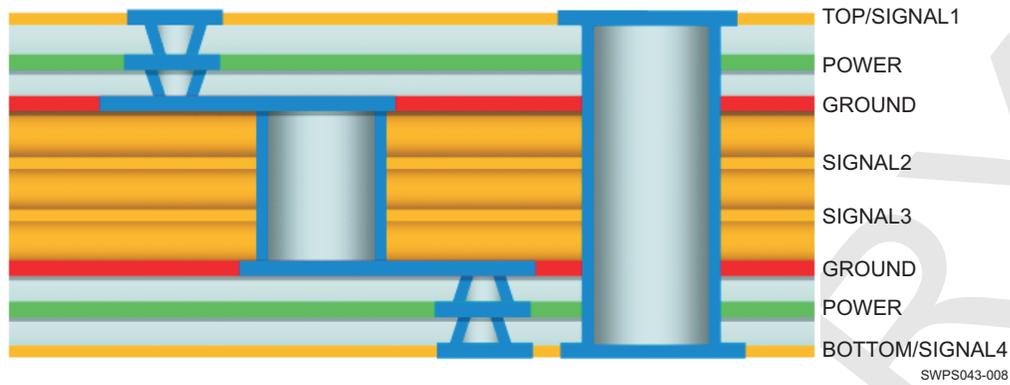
Layer PCB With Plated Through Holes (PTH) Vias
